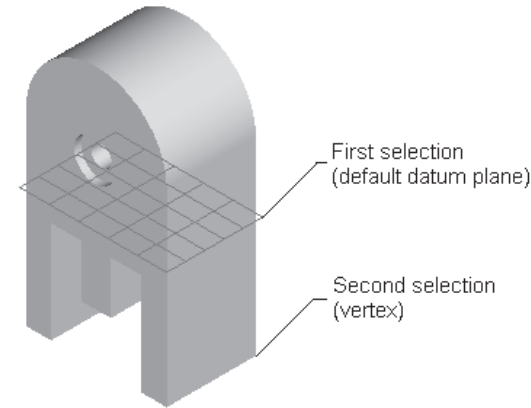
Selecting a datum plane and an axis to create a datum plane
